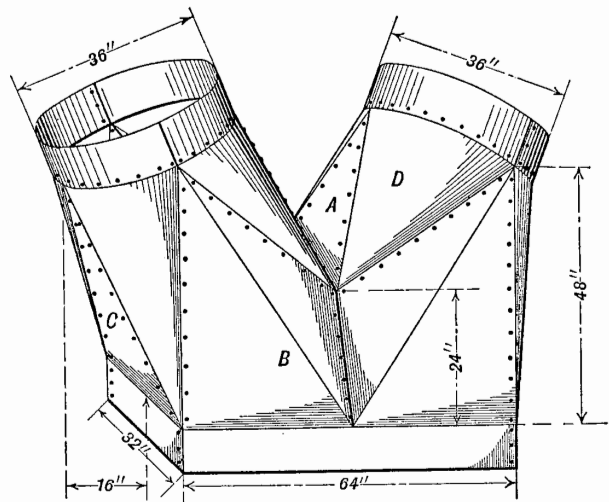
View of Riveted Transition Y with Full Size Dimensions Indicated
